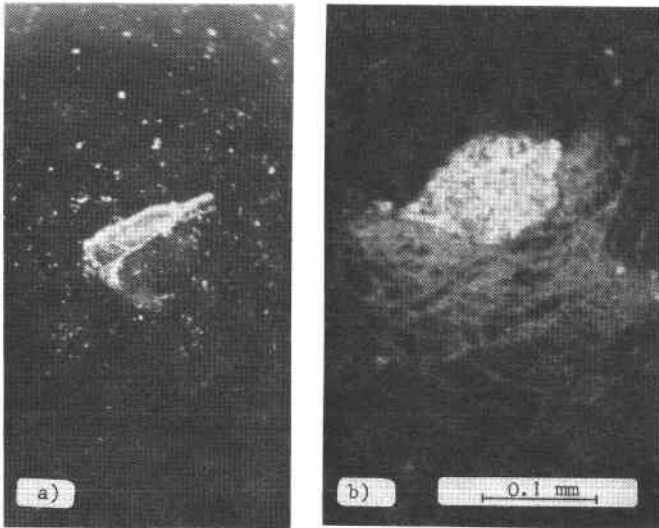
Examples for Surface Defects on WC-Co Balls after Sodium Testing (Test No. 14): a) Collapsed Pore, b) Scale type Pitting due to Fatigue
